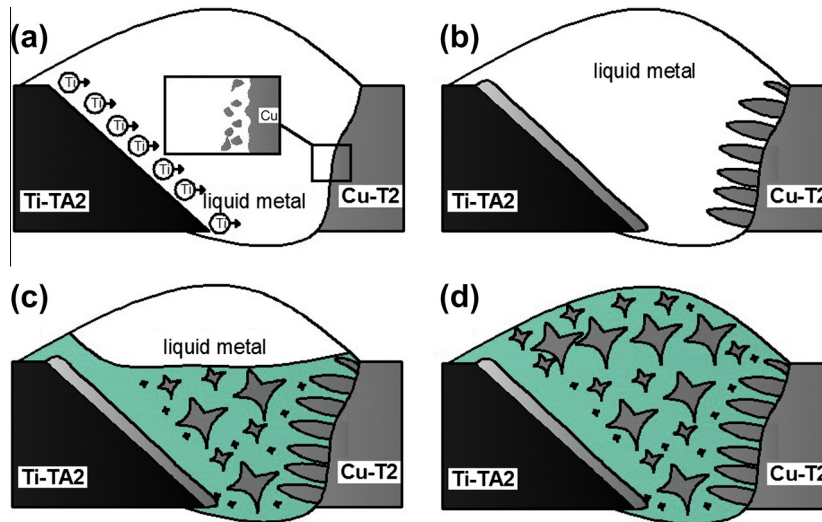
Crystallization behavior of Ti/Cu CMT welding–brazing joint: (a) formation of weld pool and diffusion of element Ti, (b) formation of columnar crystal zone and IMCs layer, (c) solidification of the seam, and (d) formation of the joint.
